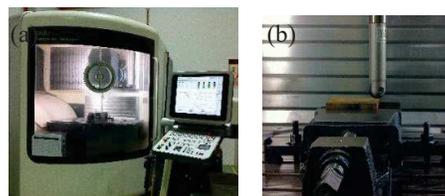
(a) DECKEL MAHO DMU 60 milling machine and (b) machining setup.
